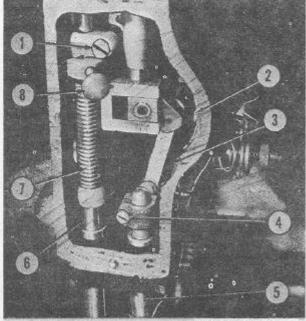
Darning machine presser bar and needle bar, disassembled.
